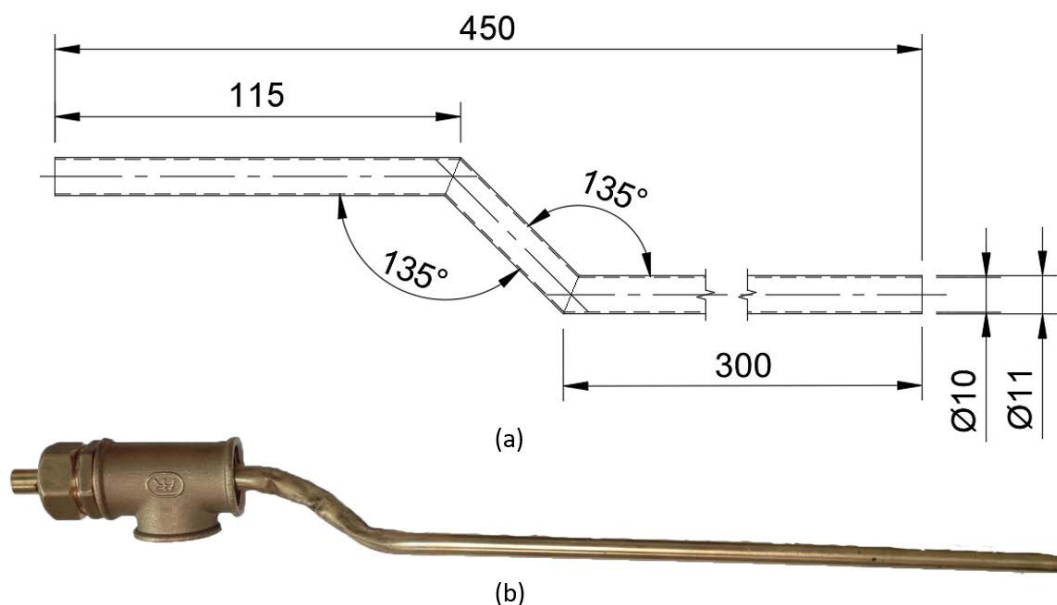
Structural component to guide and attach all the wires from the sensor (a) Specifications for tube dimensions and a technical drawing for manufacturing (b) Wended tube support for the wire passage to the piezoelectric sensors after manufacturing.
